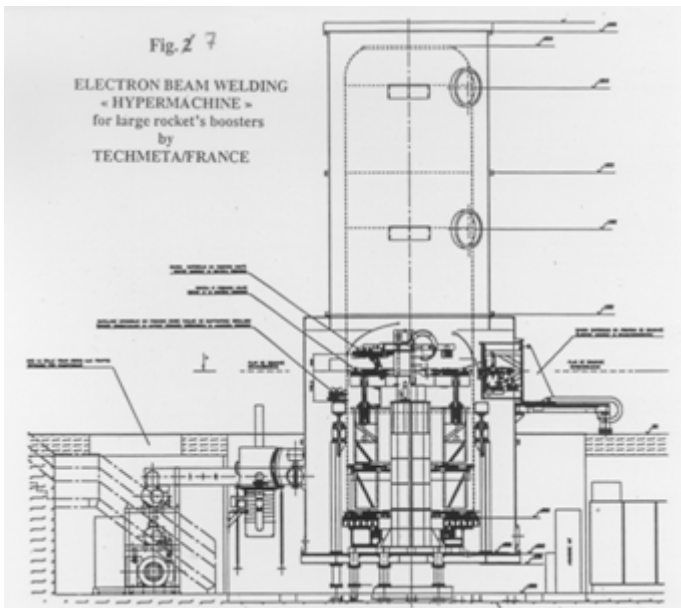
Cross-section of TECHMETA "hypermachine" in Augsburg
